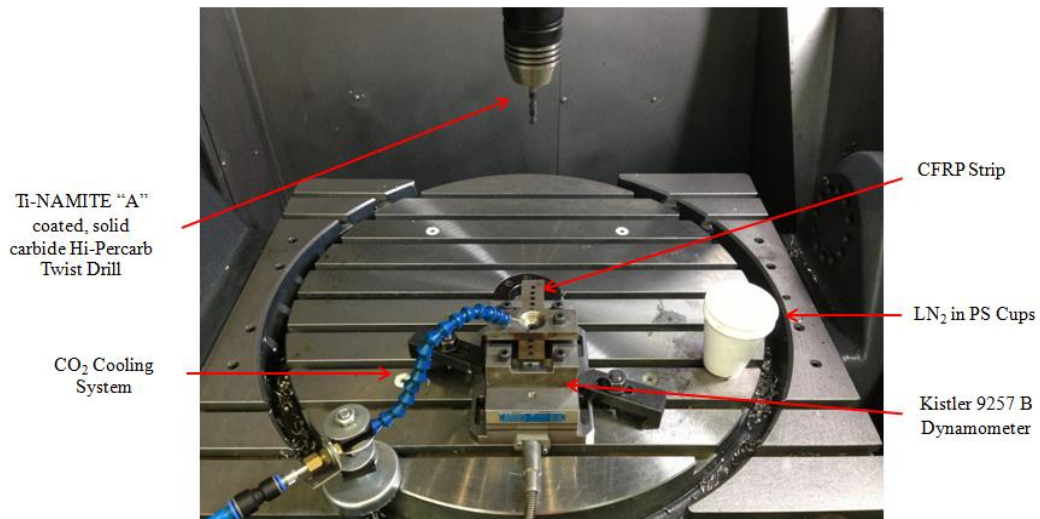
Set of the drilling test on a CFRP strip for the measurement of thrust force when machined dry at room temperature, with CO₂ cooling and with a cryogenically pre-cooled tool
